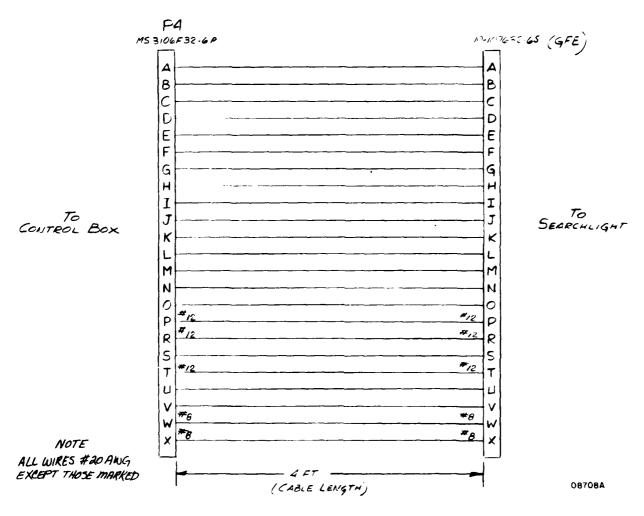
Control Box to Searchlight Wiring Diagram.
